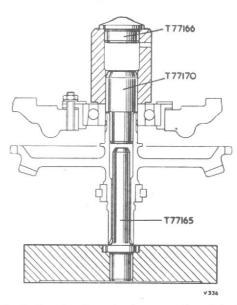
Pressing the valve box mounting plate on to the fuel pump driving gear
